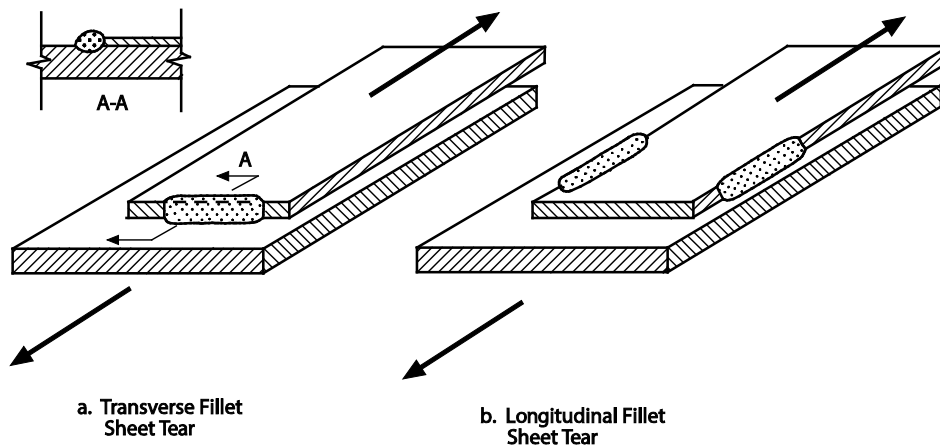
Fillet Weld Failure Modes
